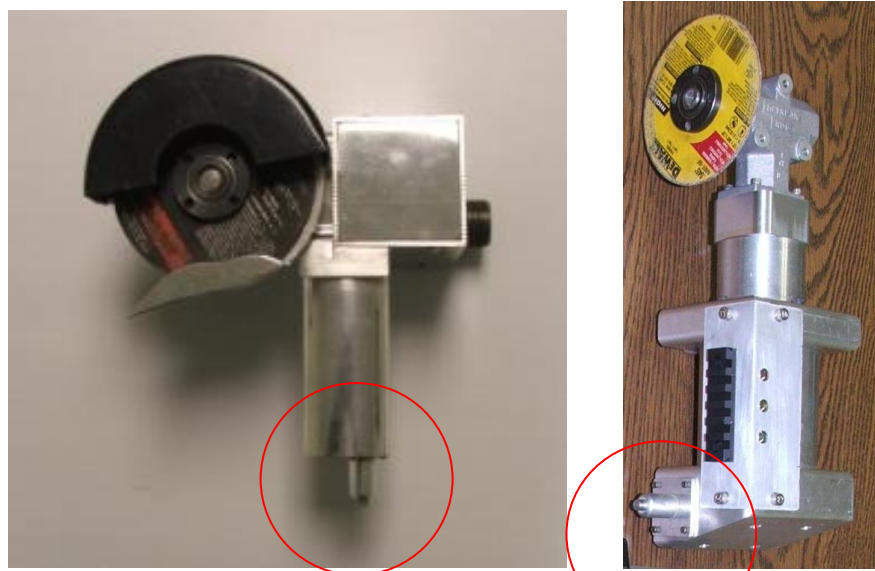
A Bump-On/Bump-Off Switch Integrated Into The Tool Handle Is One Simple Control Approach
